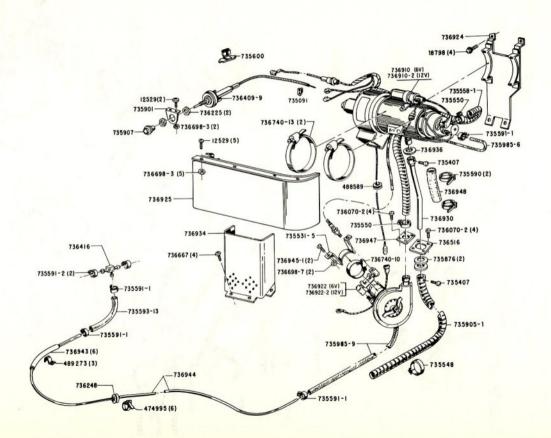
HEATER ASSEMBLY 736783 USED ON KIT 8345-B
